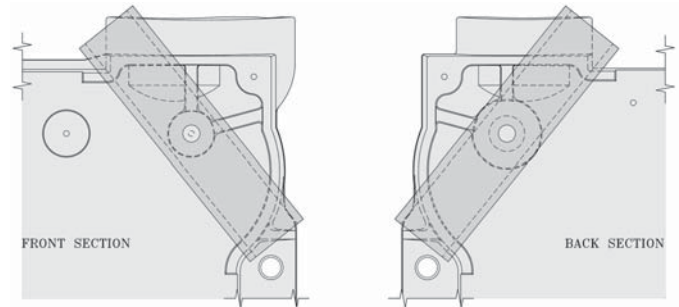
Front and Rear Section Channel Block Positions (Hydraulic Draw-up)
